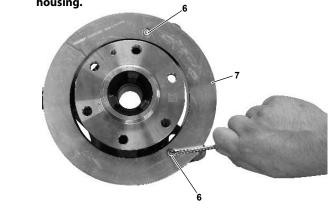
Dismantling the base plate from the wheel bearing housing.
